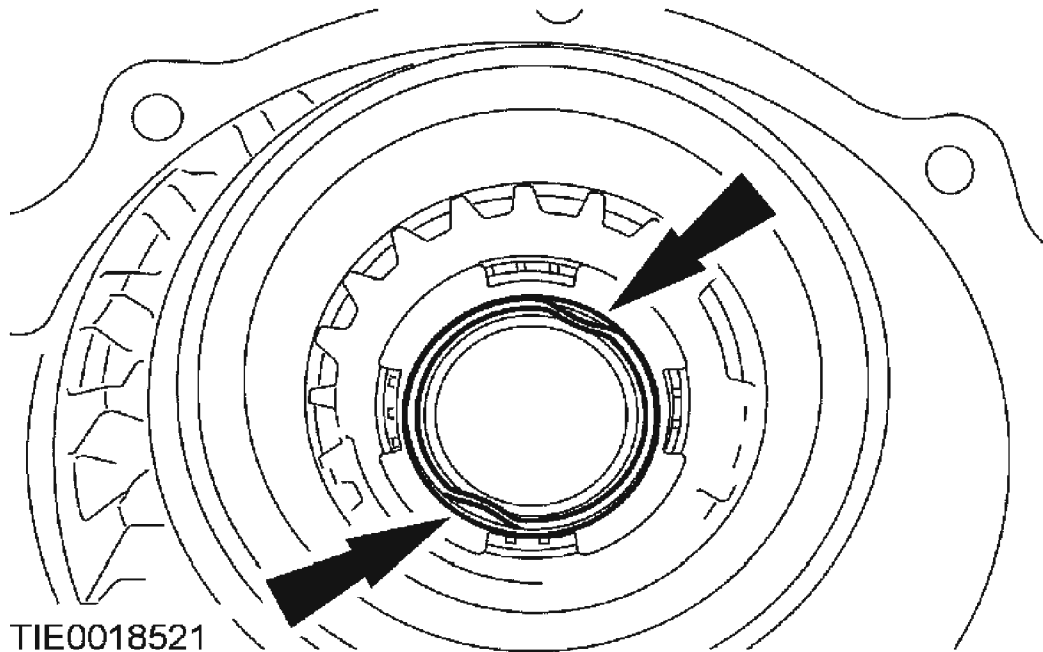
Removing Special Tools And Staking Nut To Prevent Movement
